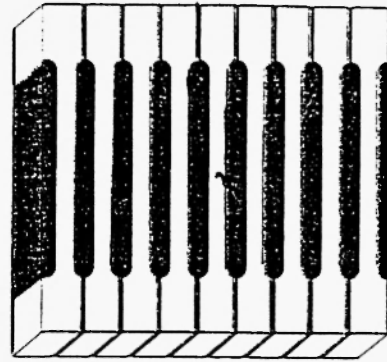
The plate casting sectioned and machined to make tensile test pieces illustrating how only one test piece happens to contain a fault.
